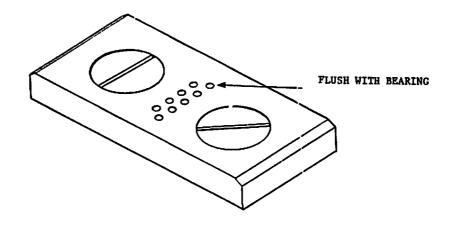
SOLENOID WIRE ADJUSTMENT
